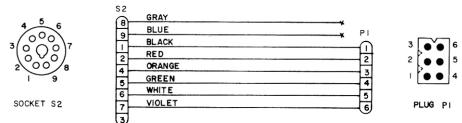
Console Connector Extension Schematic (Plug and Socket Viewed From Wire End)
